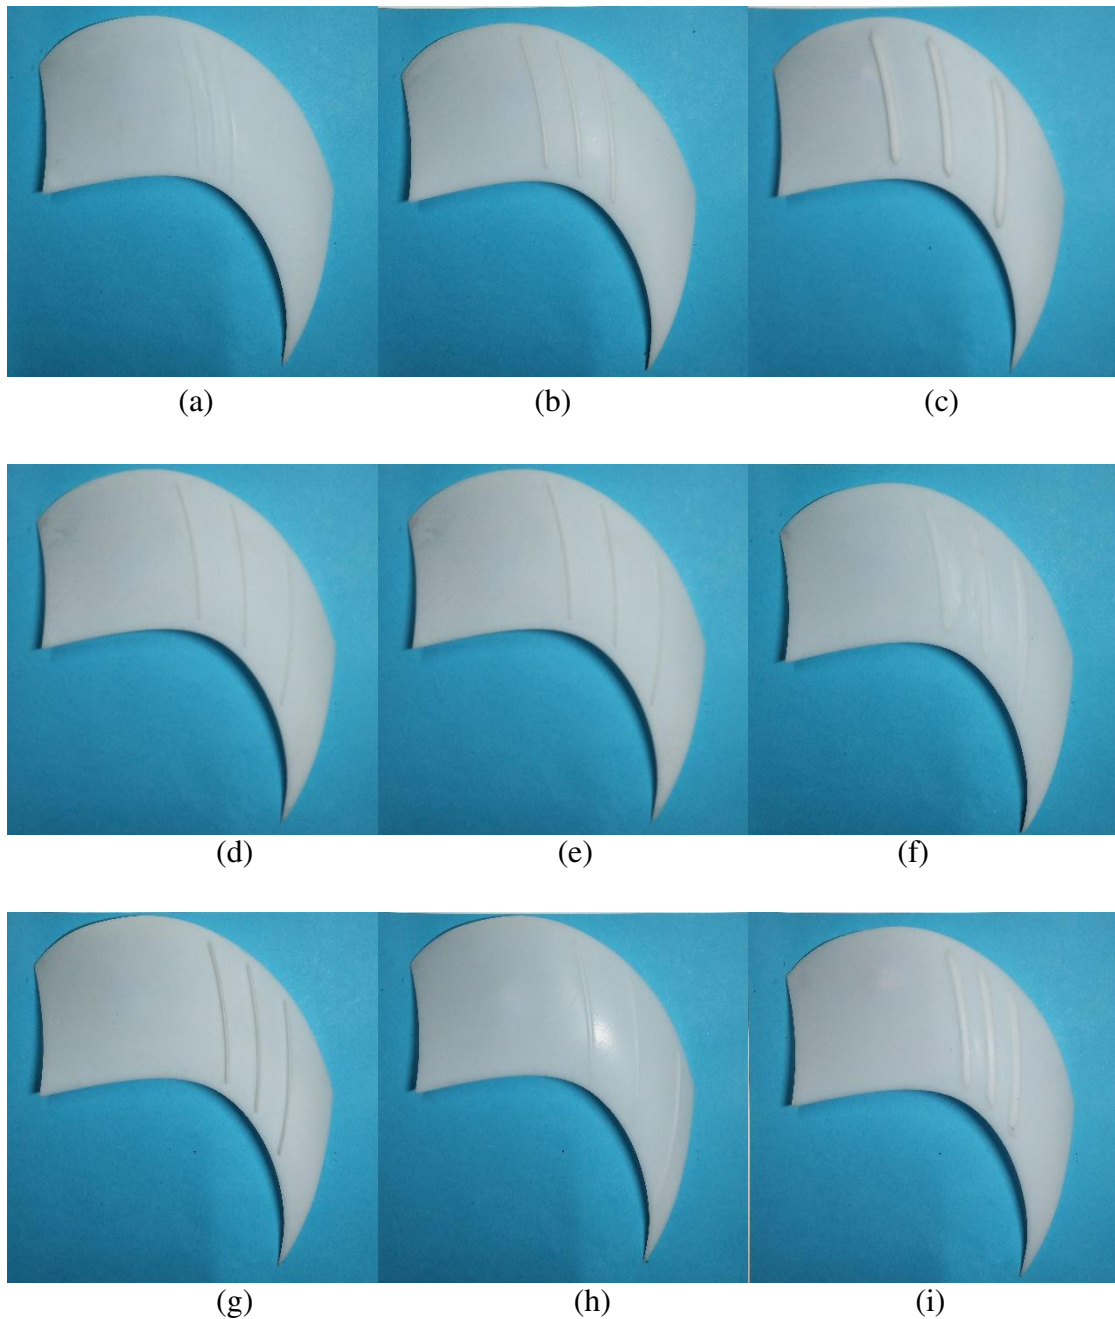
3D printed sample of bio-inspired blade. (a) FA1; (b) FA2; (c) FA3; (d) FA4; (e) FA5; (f) FA6; (g) FA7; (h) FA8; (i) FA9
